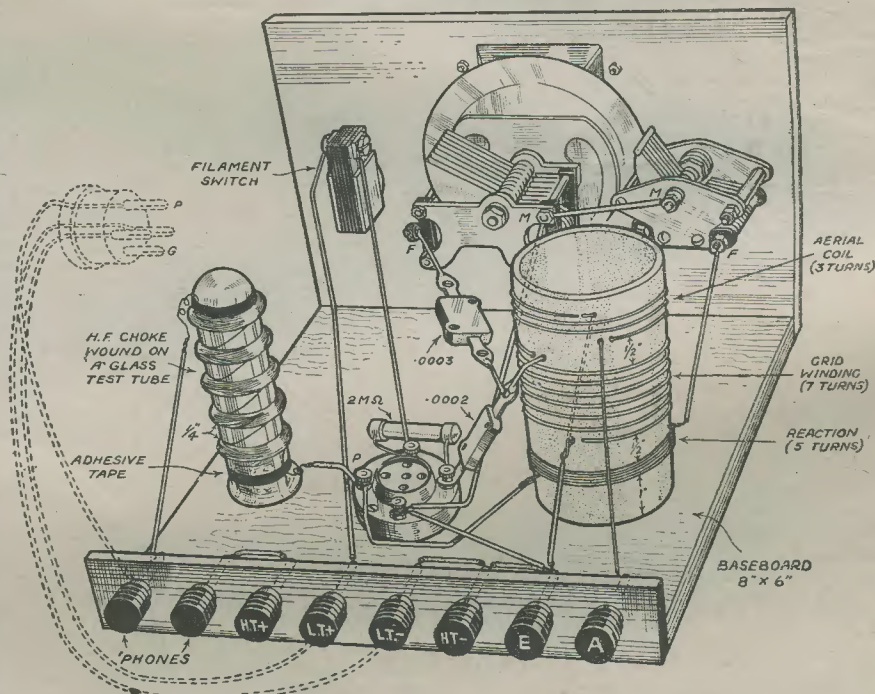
Practical wiring diagram showing the constructional details of the coil and H.F. choke.
